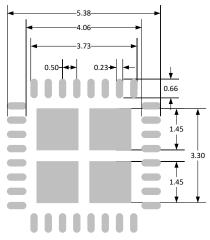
PD69200 Top-Layer Solder Paste and Vias PCB Layout for Thermal Pad Array
